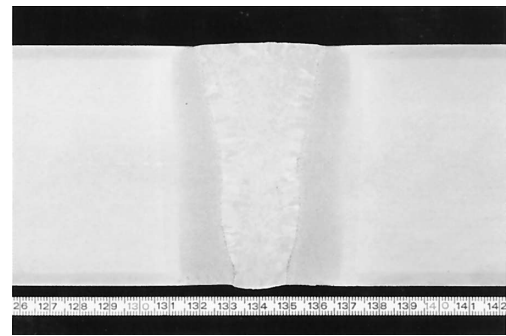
Macrostructure of YS390 N/mm² class welded joint (Electro-gas arc welding, heat input = 680 kJ/cm)
